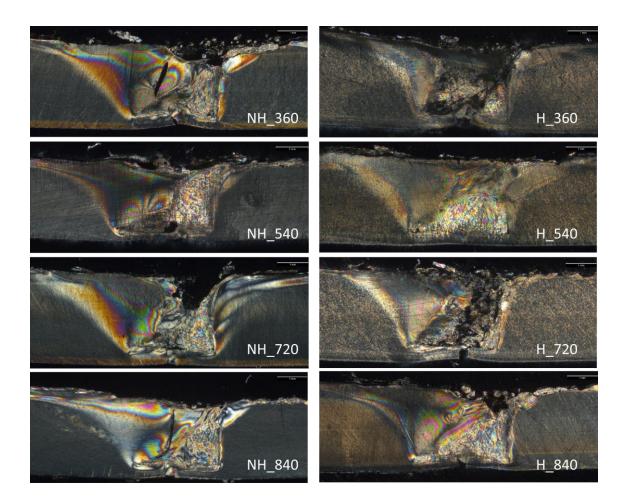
Weld cross sectional micrographs under cross-polarized light for samples welded with assisted heating (H) or without assisted heating (NH)
